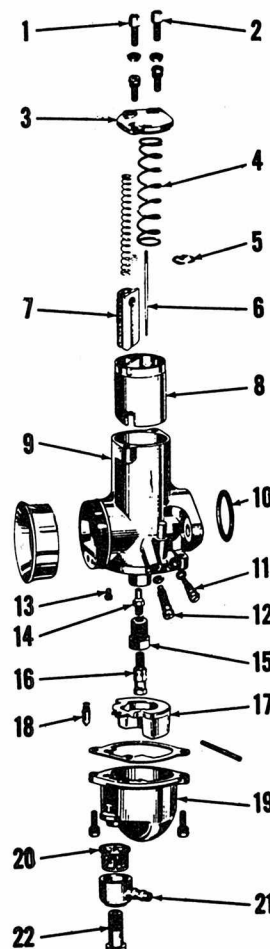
Exploded view of carburetor typical of original equipment on all models.
